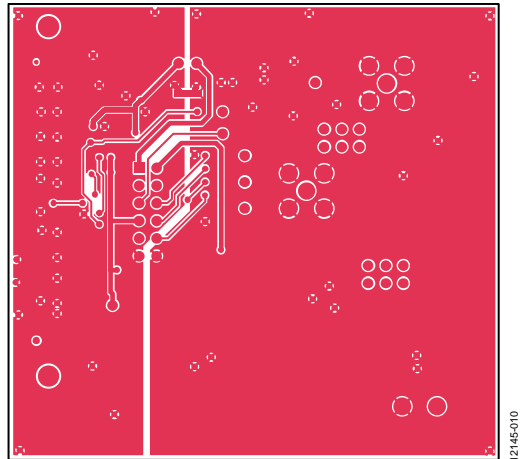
EVAL-AD5693RSDZ Solder Side PCB Drawing
